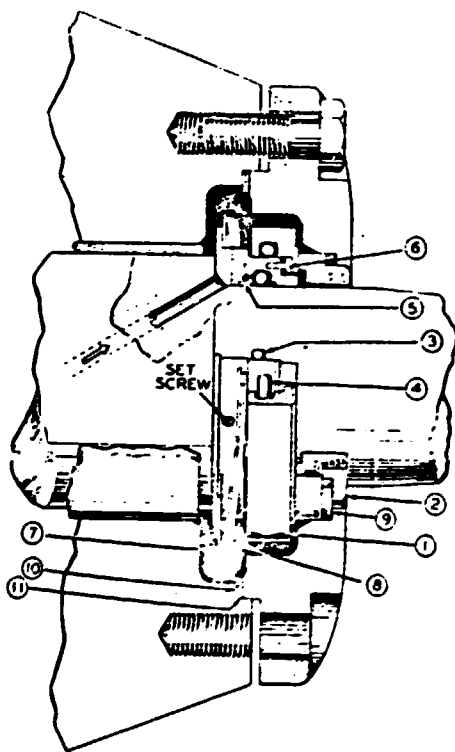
CONVERSION KIT - BALANCED SHAFT SEAL - "A" MODEL COMPRESSORS
